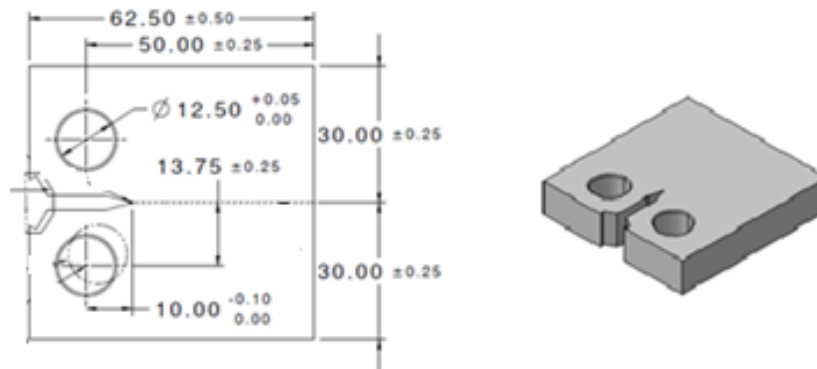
Dimension of the crack growth test specimen per ASTM E647
